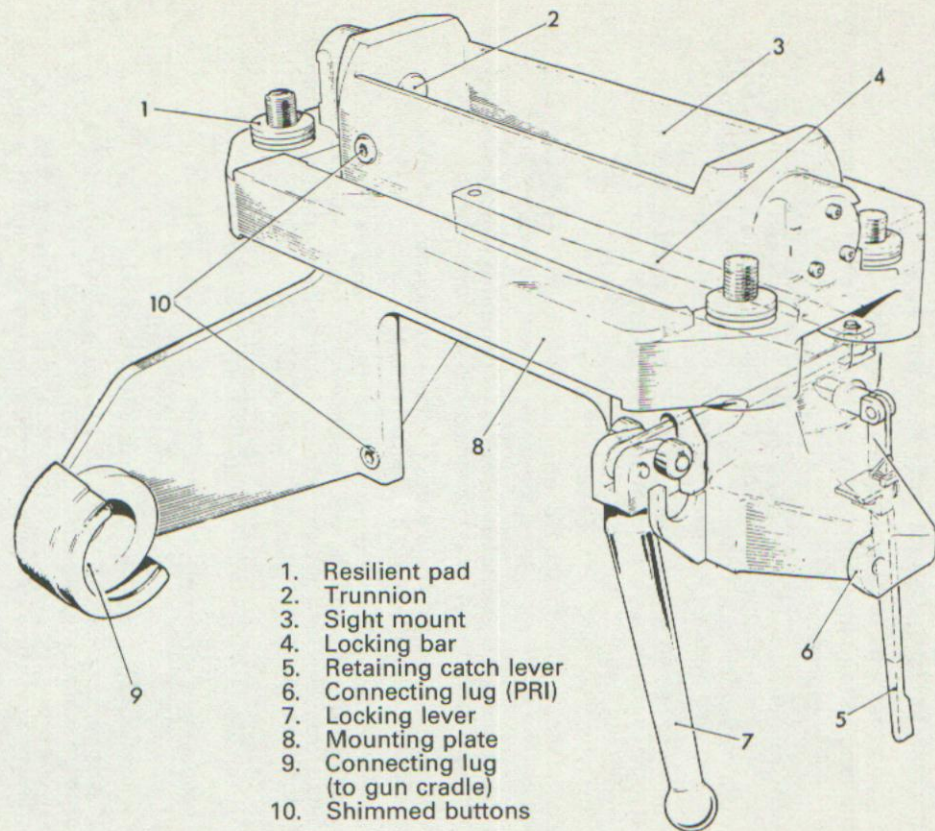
Mount, periscopic sight, No. 39, Mk 1
